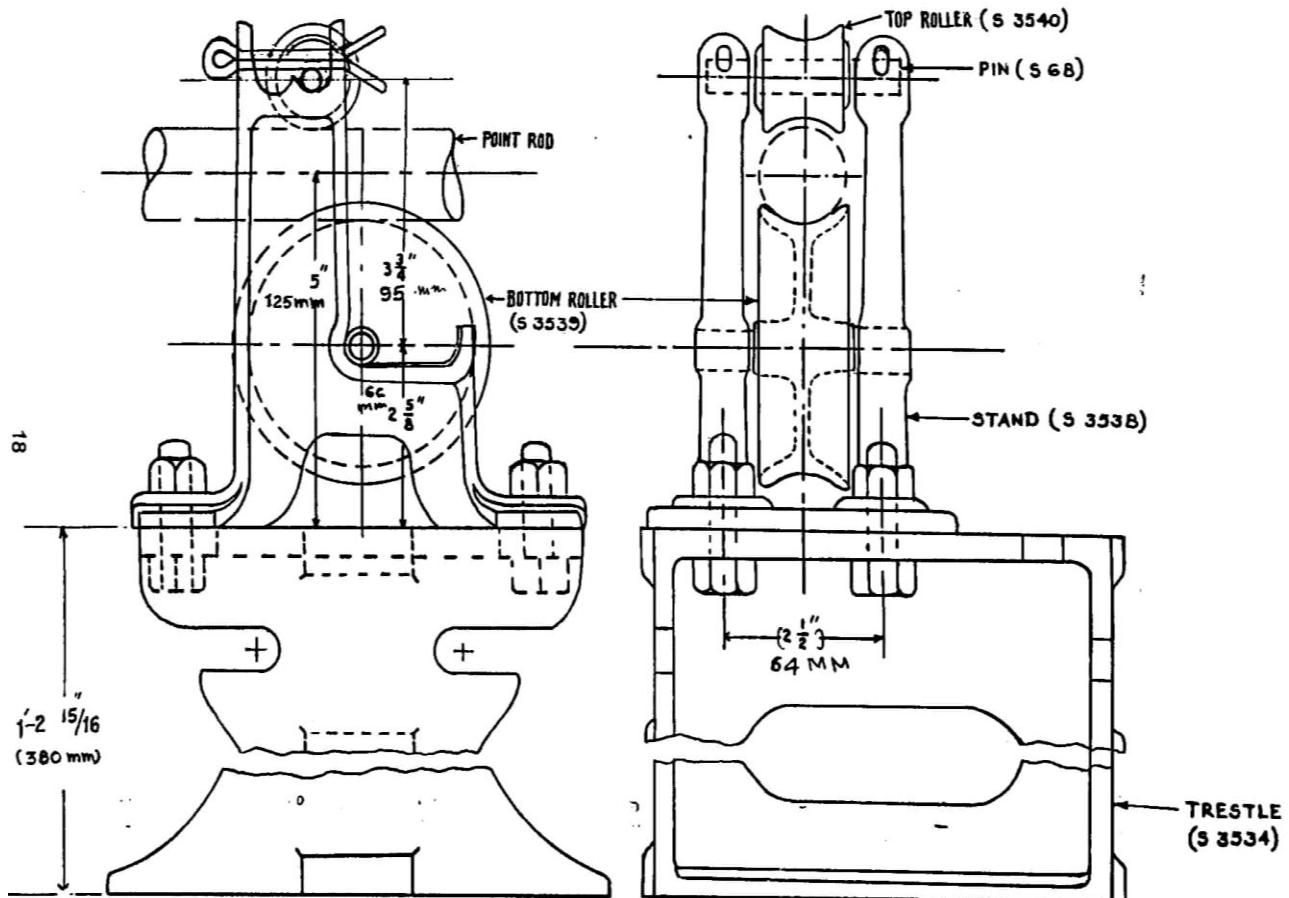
GUIDE ROLLER ASSEMBLY-1 WAY (SA-3537)
